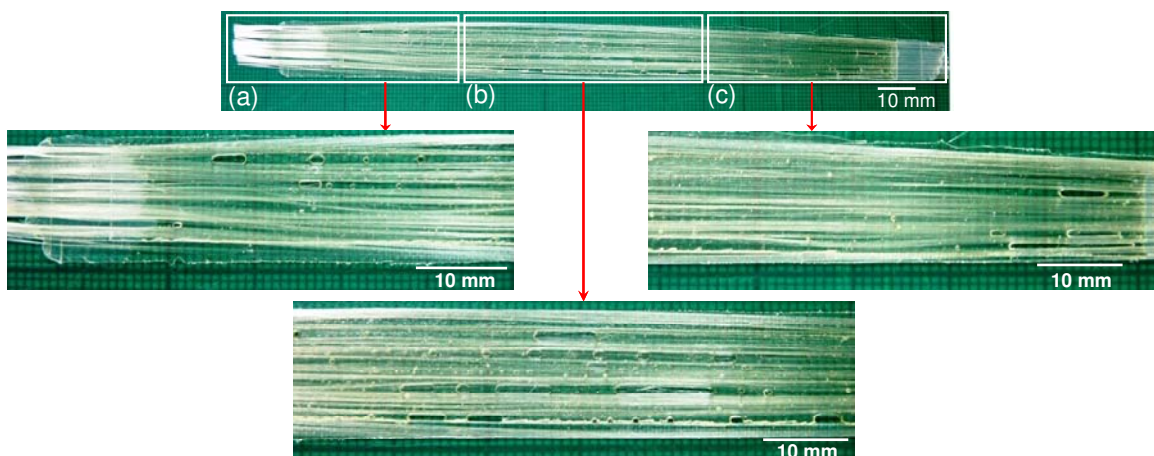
Self-sensing composite manufactured from EPO-TEK<sup>®</sup>-310M resin using the open-mould fabrication process with magnified views of sections ‘a’, ‘b’ and ‘c’.
